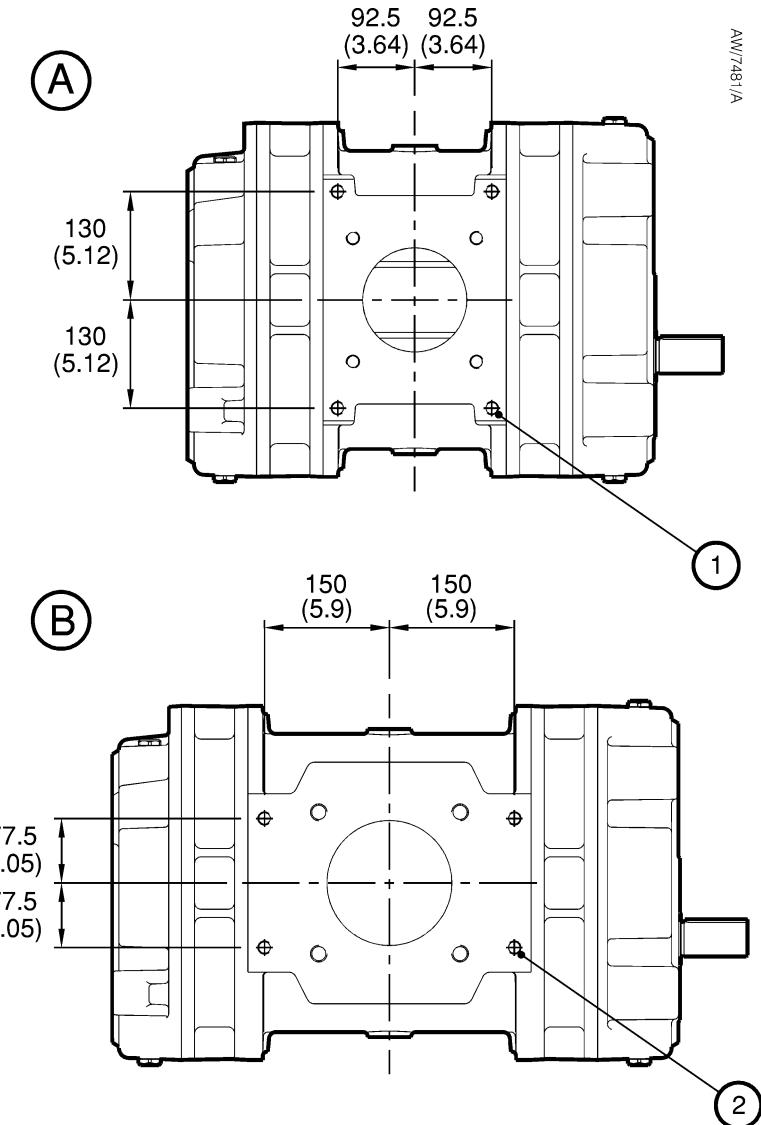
Discharge (outlet)/injection ports dimensions: mm (inch)
